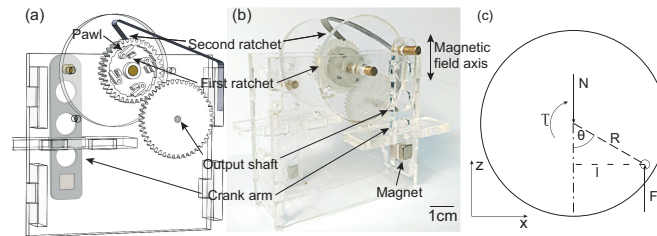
The developed magnetic force driven wireless motor. (a) CAD section view and (b) Photograph. (c) Force analysis.
